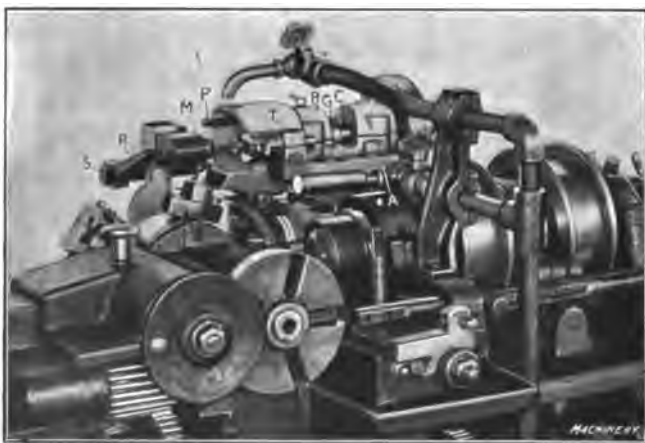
Rear View of the Burring Attachment placed on a No. 00 Brown & Sharpe Automatic Screw Machine
